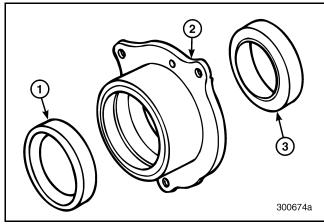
Exploded View of Front Countershaft Rear Bearing Cover
